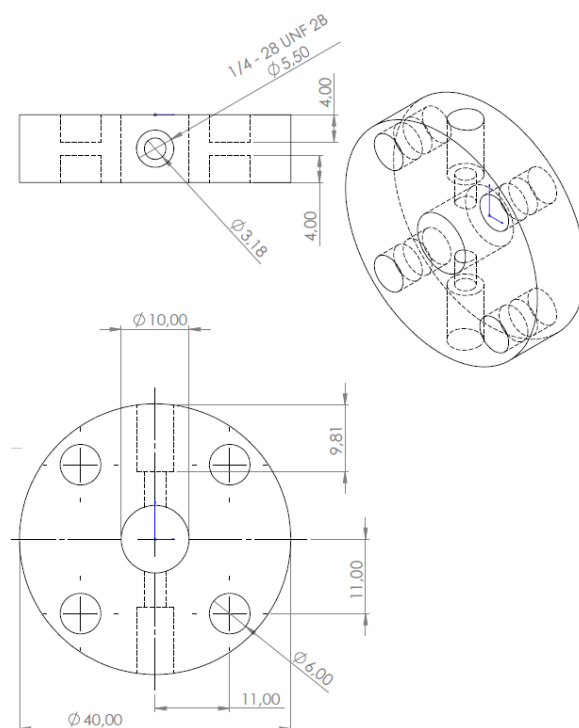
Technical drawing in mm's of the reactor chamber piece.
